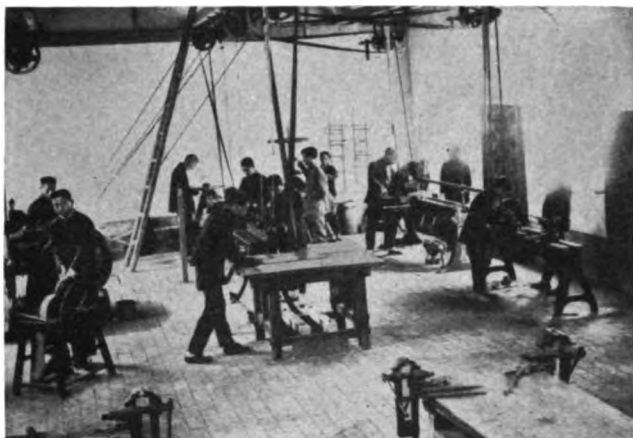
MACHINE SHOP OF YU TE SCHOOL IN 1919 WITH OIL ENGINE AND NEWER MACHINERY.
